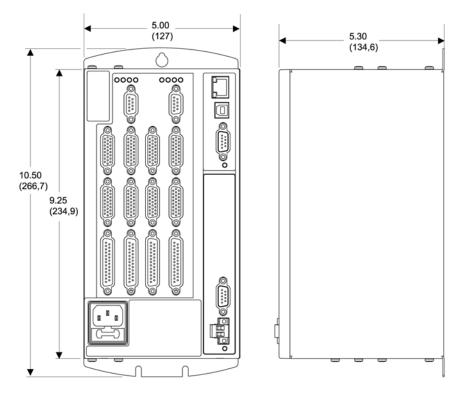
ACR9000 and ACR9030 6/8 Axis Dimensions
